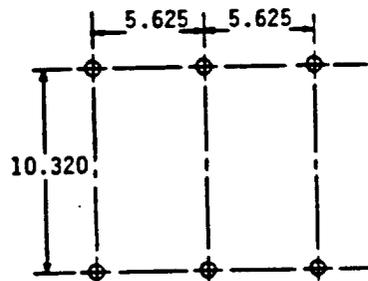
MOUNTING BOLT PATTERN.
